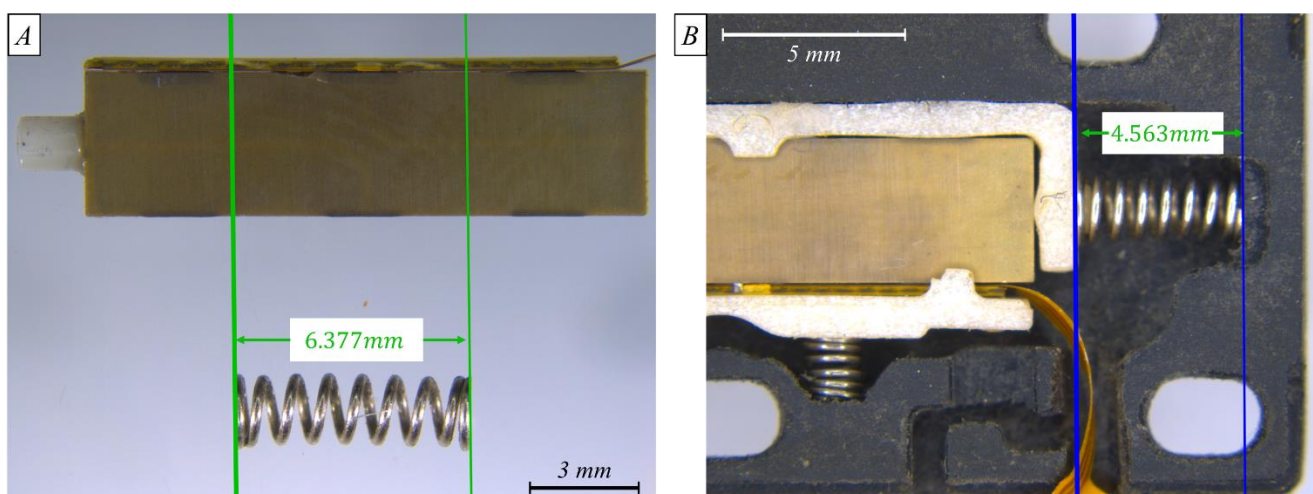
A. Measurement of the preload spring. B. Preload spring after assembly in the USM housing.
